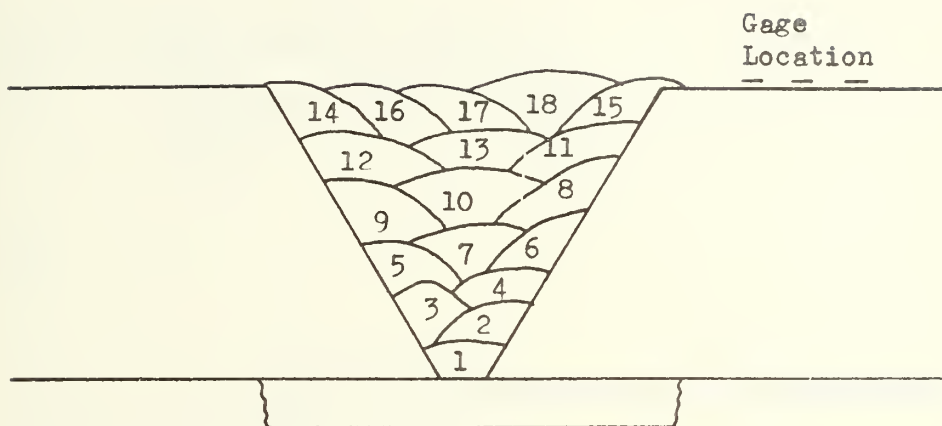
SEQUENCE OF WELD PASSES
